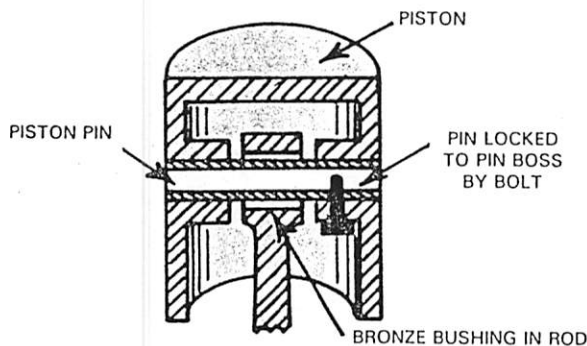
Piston pin locked to one pin boss allows rod to oscillate on pin.
